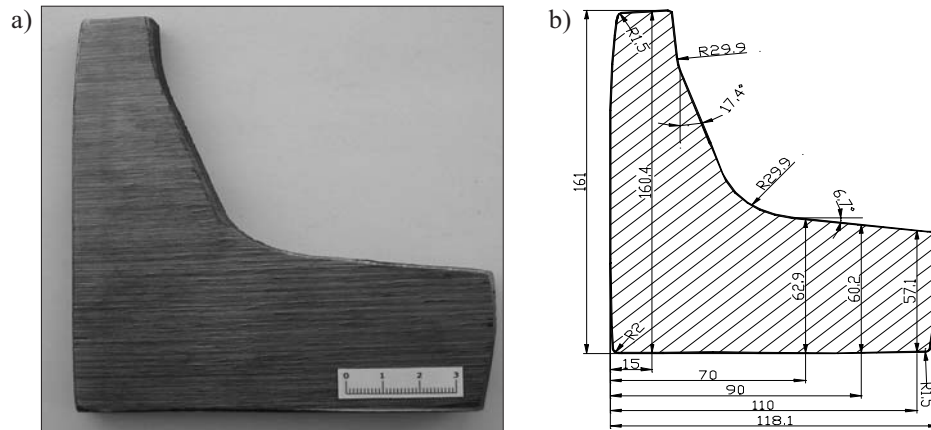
Sample of the cross section of the 20'' *welding neck* ring: a) sample of the cross section; b) scheme of the cross section
